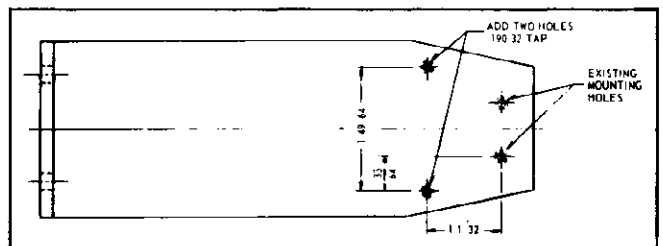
Mounting bracket drill plan when replacing Type L61 Auxiliary with Type L64 on Types M-810 and M-910 Contactors
